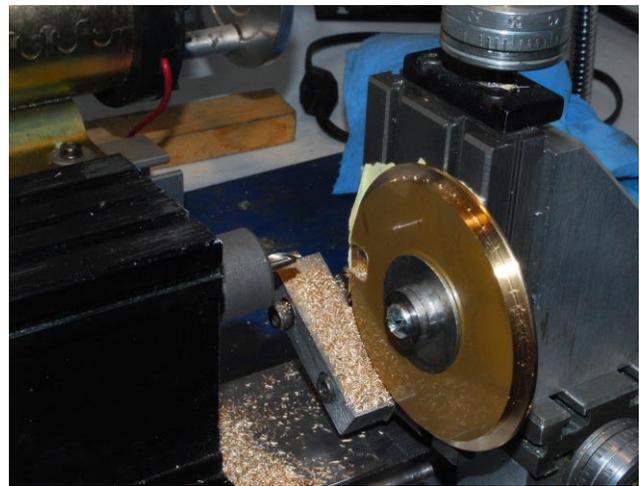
Milling the cable cutout in the barrel flange. Clamp the flange tightly and take light cuts so the flange does not spin like this one did as evidenced by the endmill "tracks" around the barrel shoulder.
